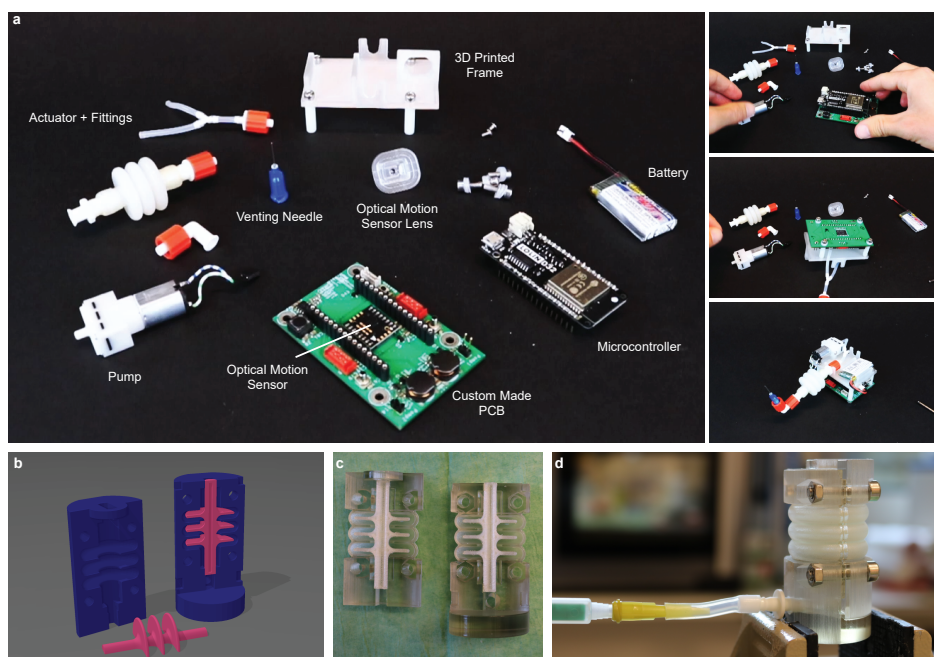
Unit assembly and bellow actuator fabrication. a, Overview of unit components and assembly process. b, CAD models of bellow actuator moulds. The outer mould (in blue) was printed in VeroClear (Stratasys Eden260VS), and the inner core (in pink) was printed in soluble PVA (Ultimaker 3). c, 3D printed parts before casting. d, Injection casting of bellow actuator with Dragon Skin 30 (Smooth-ON).
